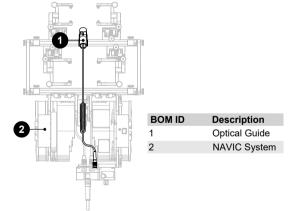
Optical Guide mounted to a low profile probe holder frame
